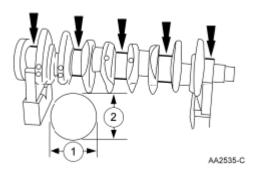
Identifying Measuring Directions Of Crankshaft Main Bearing Journal Diameter
